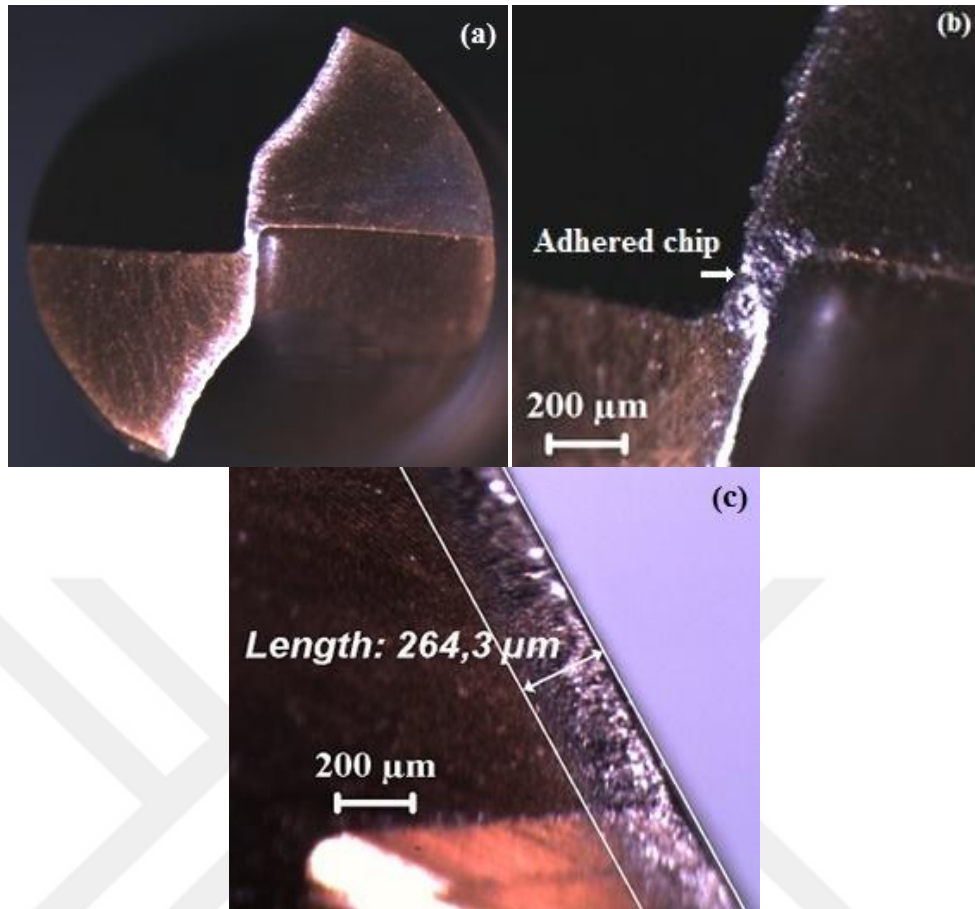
Low magnification optical image: (a) top view, (b) chisel edge, and (c) flank face, for the worn PVD-coated drill bit at $V_C=30$ m/min and $f=0.20$ mm/rev, whilst the drilling of the hybrid Mg/SiC/GNPs MC.
